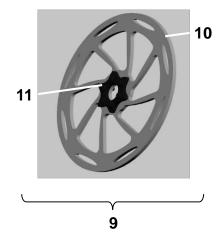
FRONT WHEEL BRAKE (SHEET 2 OF 2)
